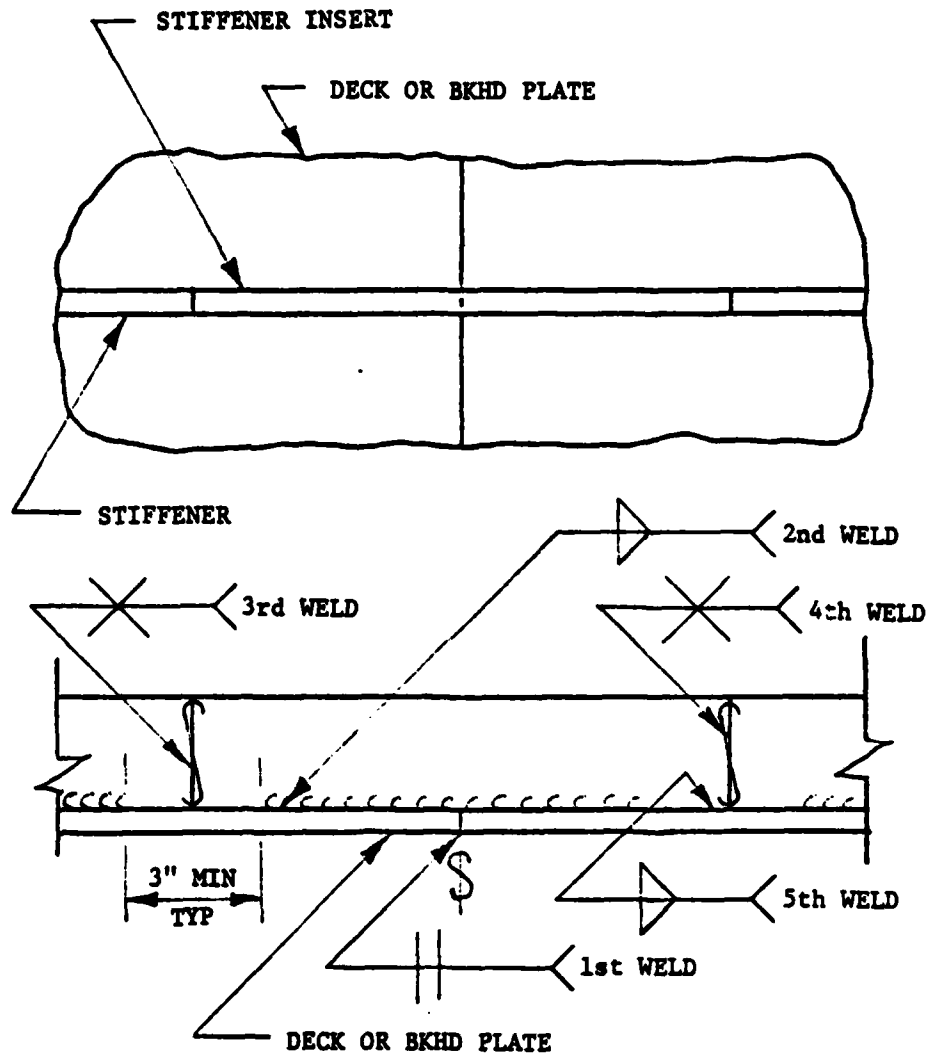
illustrates the erection joint for decks and bulkheads and provides the welding sequence for attaching the stiffener inserts.
